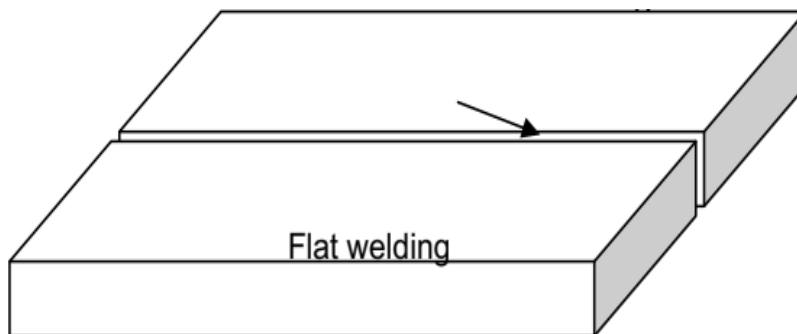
Scheme of placement of components to be welded for flat welding
